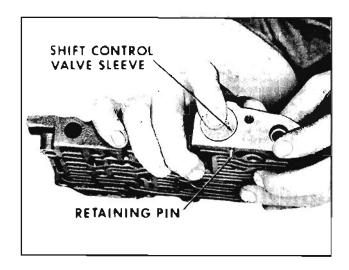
Removing Shift Control Valve and Shift Valve
